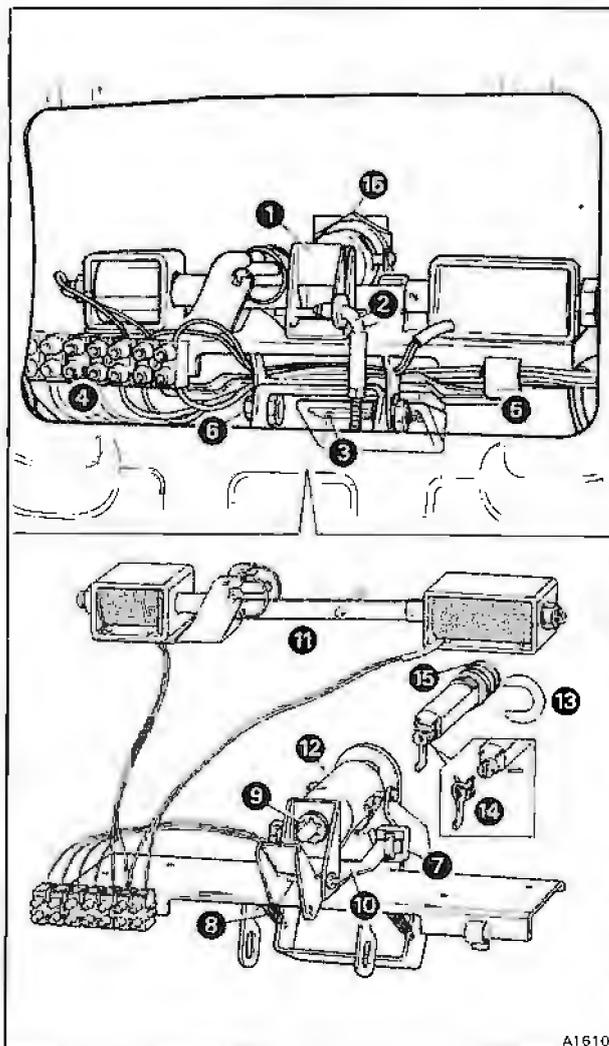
Lock mechanism (incorporating a metal release lever)
